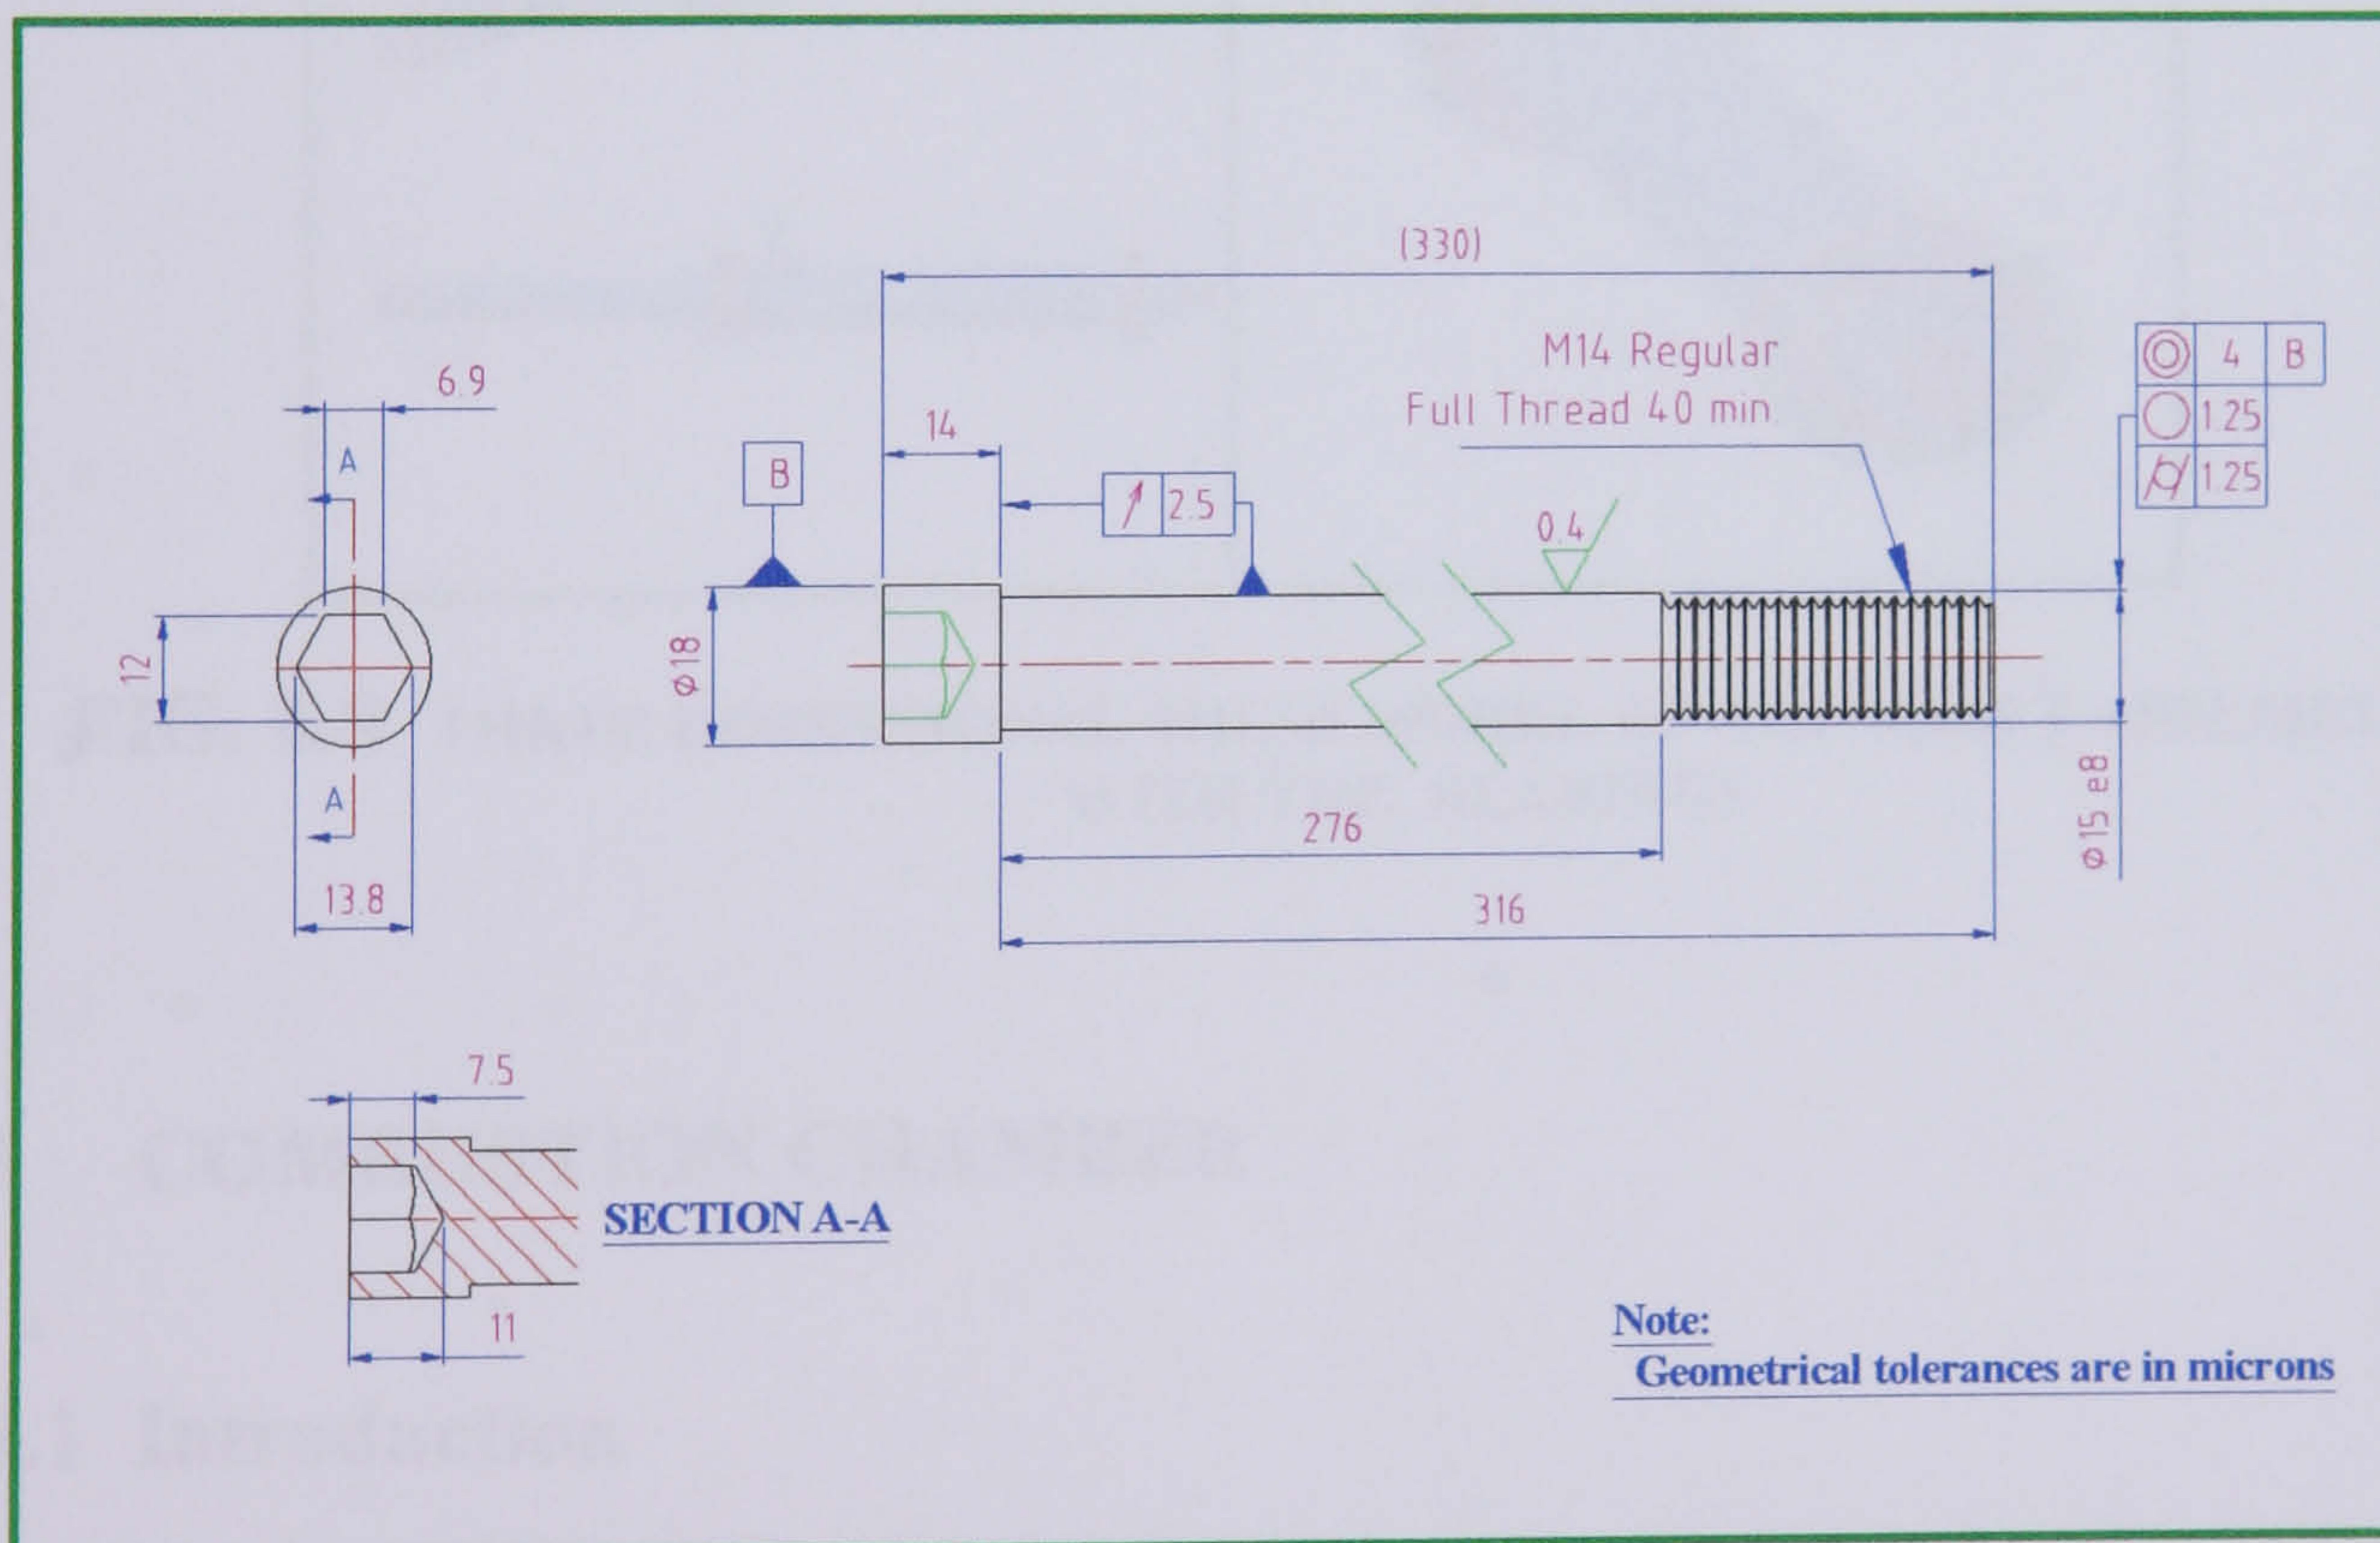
DETAIL DIMENSIONS OF THE BOLT
